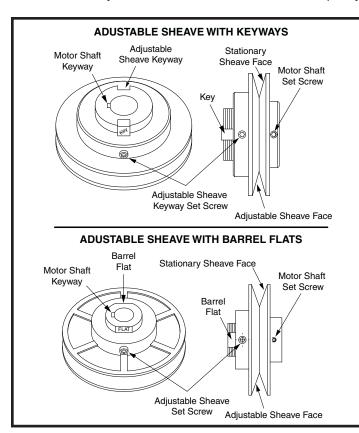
Adjustable Sheaves with Keyways or Barrel Flats
